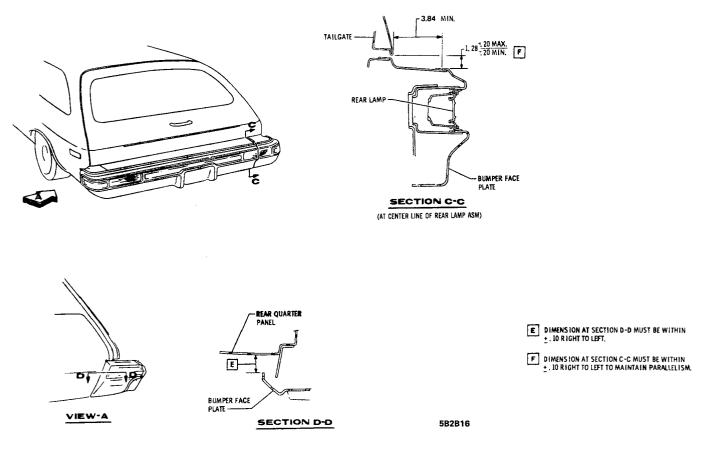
B-16 A Series Wagon Rear Bumper Clearances
